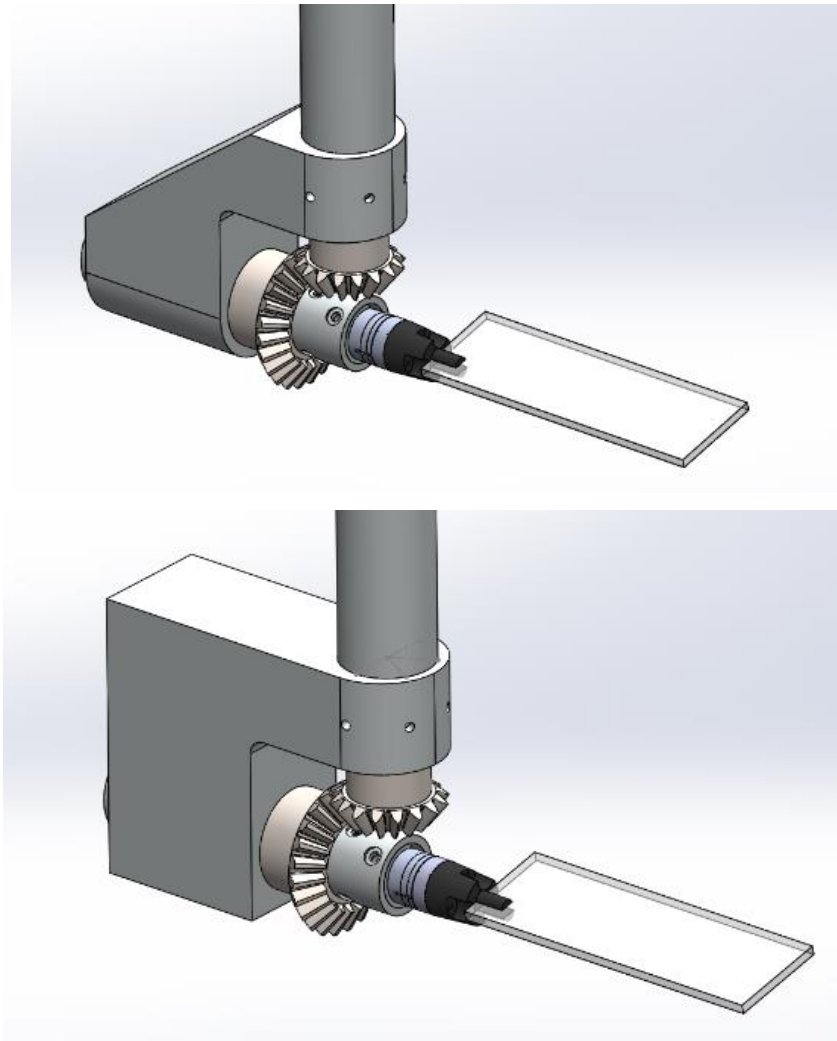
a) initial proposed design (top), b) manufactured design (bottom)
